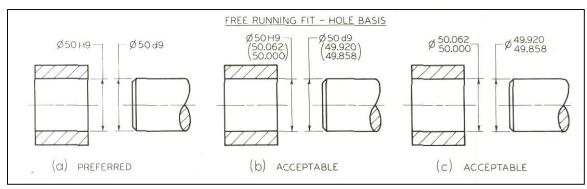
Methods of specifying tolerances with symbols for mating parts.
